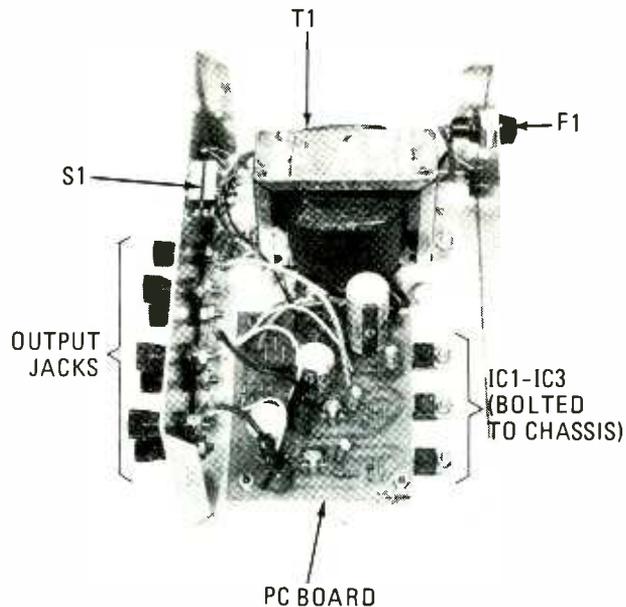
THE EASIEST WAY to build this project is to use a printed circuit board. The author's board configuration is shown here.
